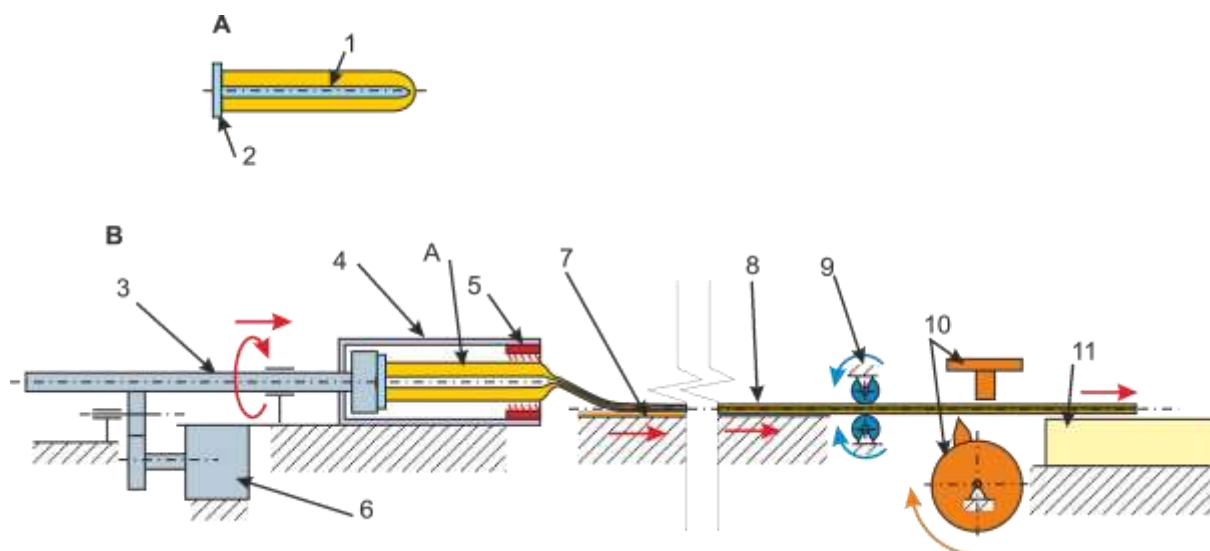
Diagram of two-stage drawing of seed beads: A - bar, B - production, 1 - mandrel (it is removed before inserting into the furnace), 2 - metal ring, 3 - toothed guide shaft, 4 - drawing furnace, 5 - heating coils, 6 - guide shaft drive, 7 - wooden board, 8 - drawn tube, 9 - drawing device, 10 - separator, 11 - bin
